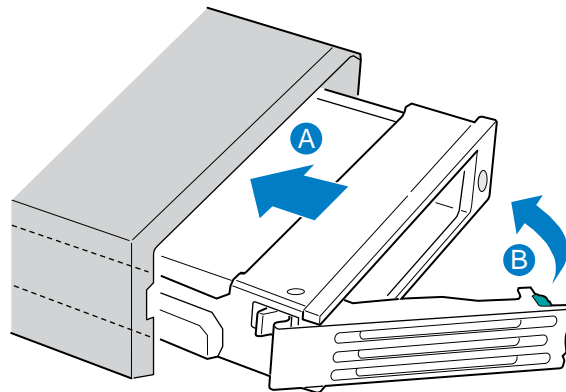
Attaching a Hot-swap Hard Disk Drive to a Carrier
